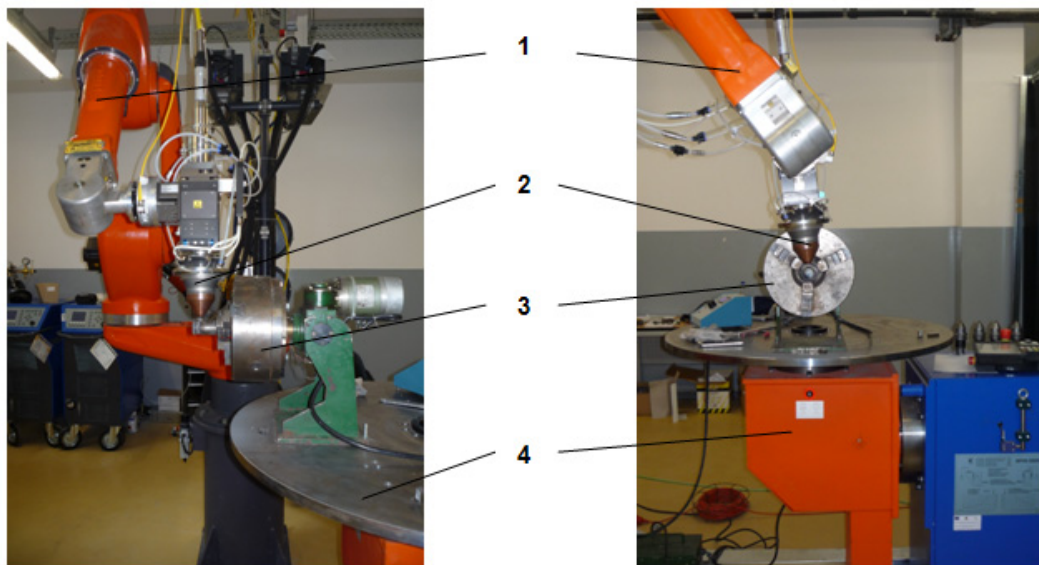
Experimental assembly used for laser metal deposition using a robotic cell: (1) welding robot; (2) processing head-laser deposition module; (3) tooth rotating and positioning device; (4) rotating and positioning table.
